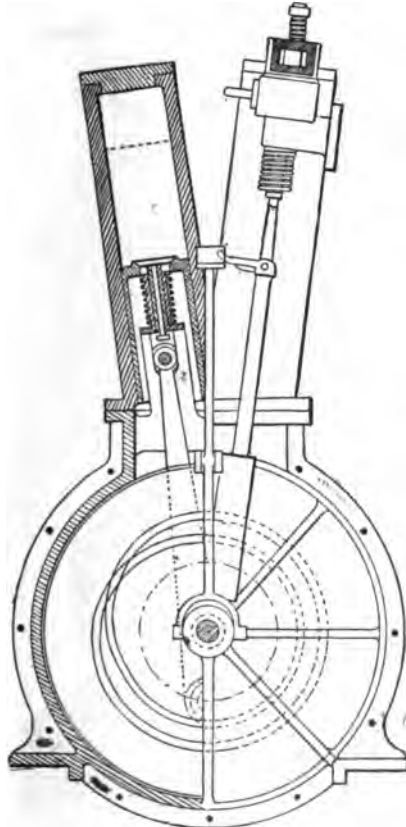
Part sectional view of the Daimler V-shaped Gasoline Engine, showing the air valve in the piston and eccentric cam grooves on the fly-wheel disc. The method of opening the exhaust valve is also indicated.
